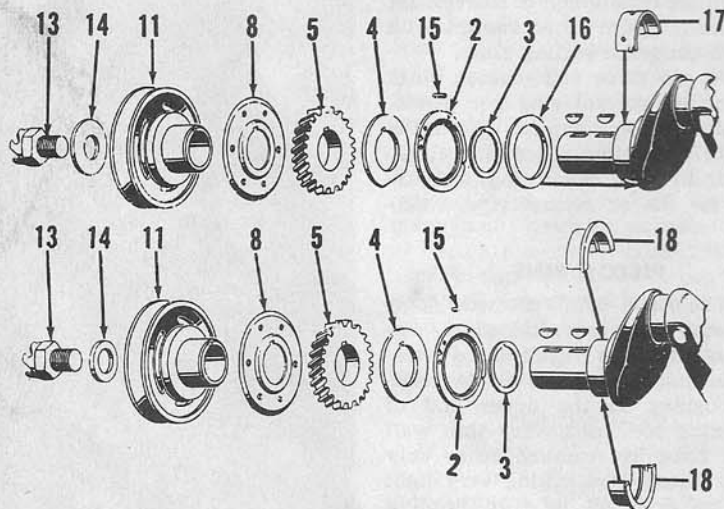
Crankshaft end play is controlled with shims (3), which are accessible after removing the crankshaft gear (5). Top view: Model TO30 installation. Thrust washer (16) is used because the number one main bearing shell (17) does not have a flange. Bottom view: Models TE20 and TO20 installation.
